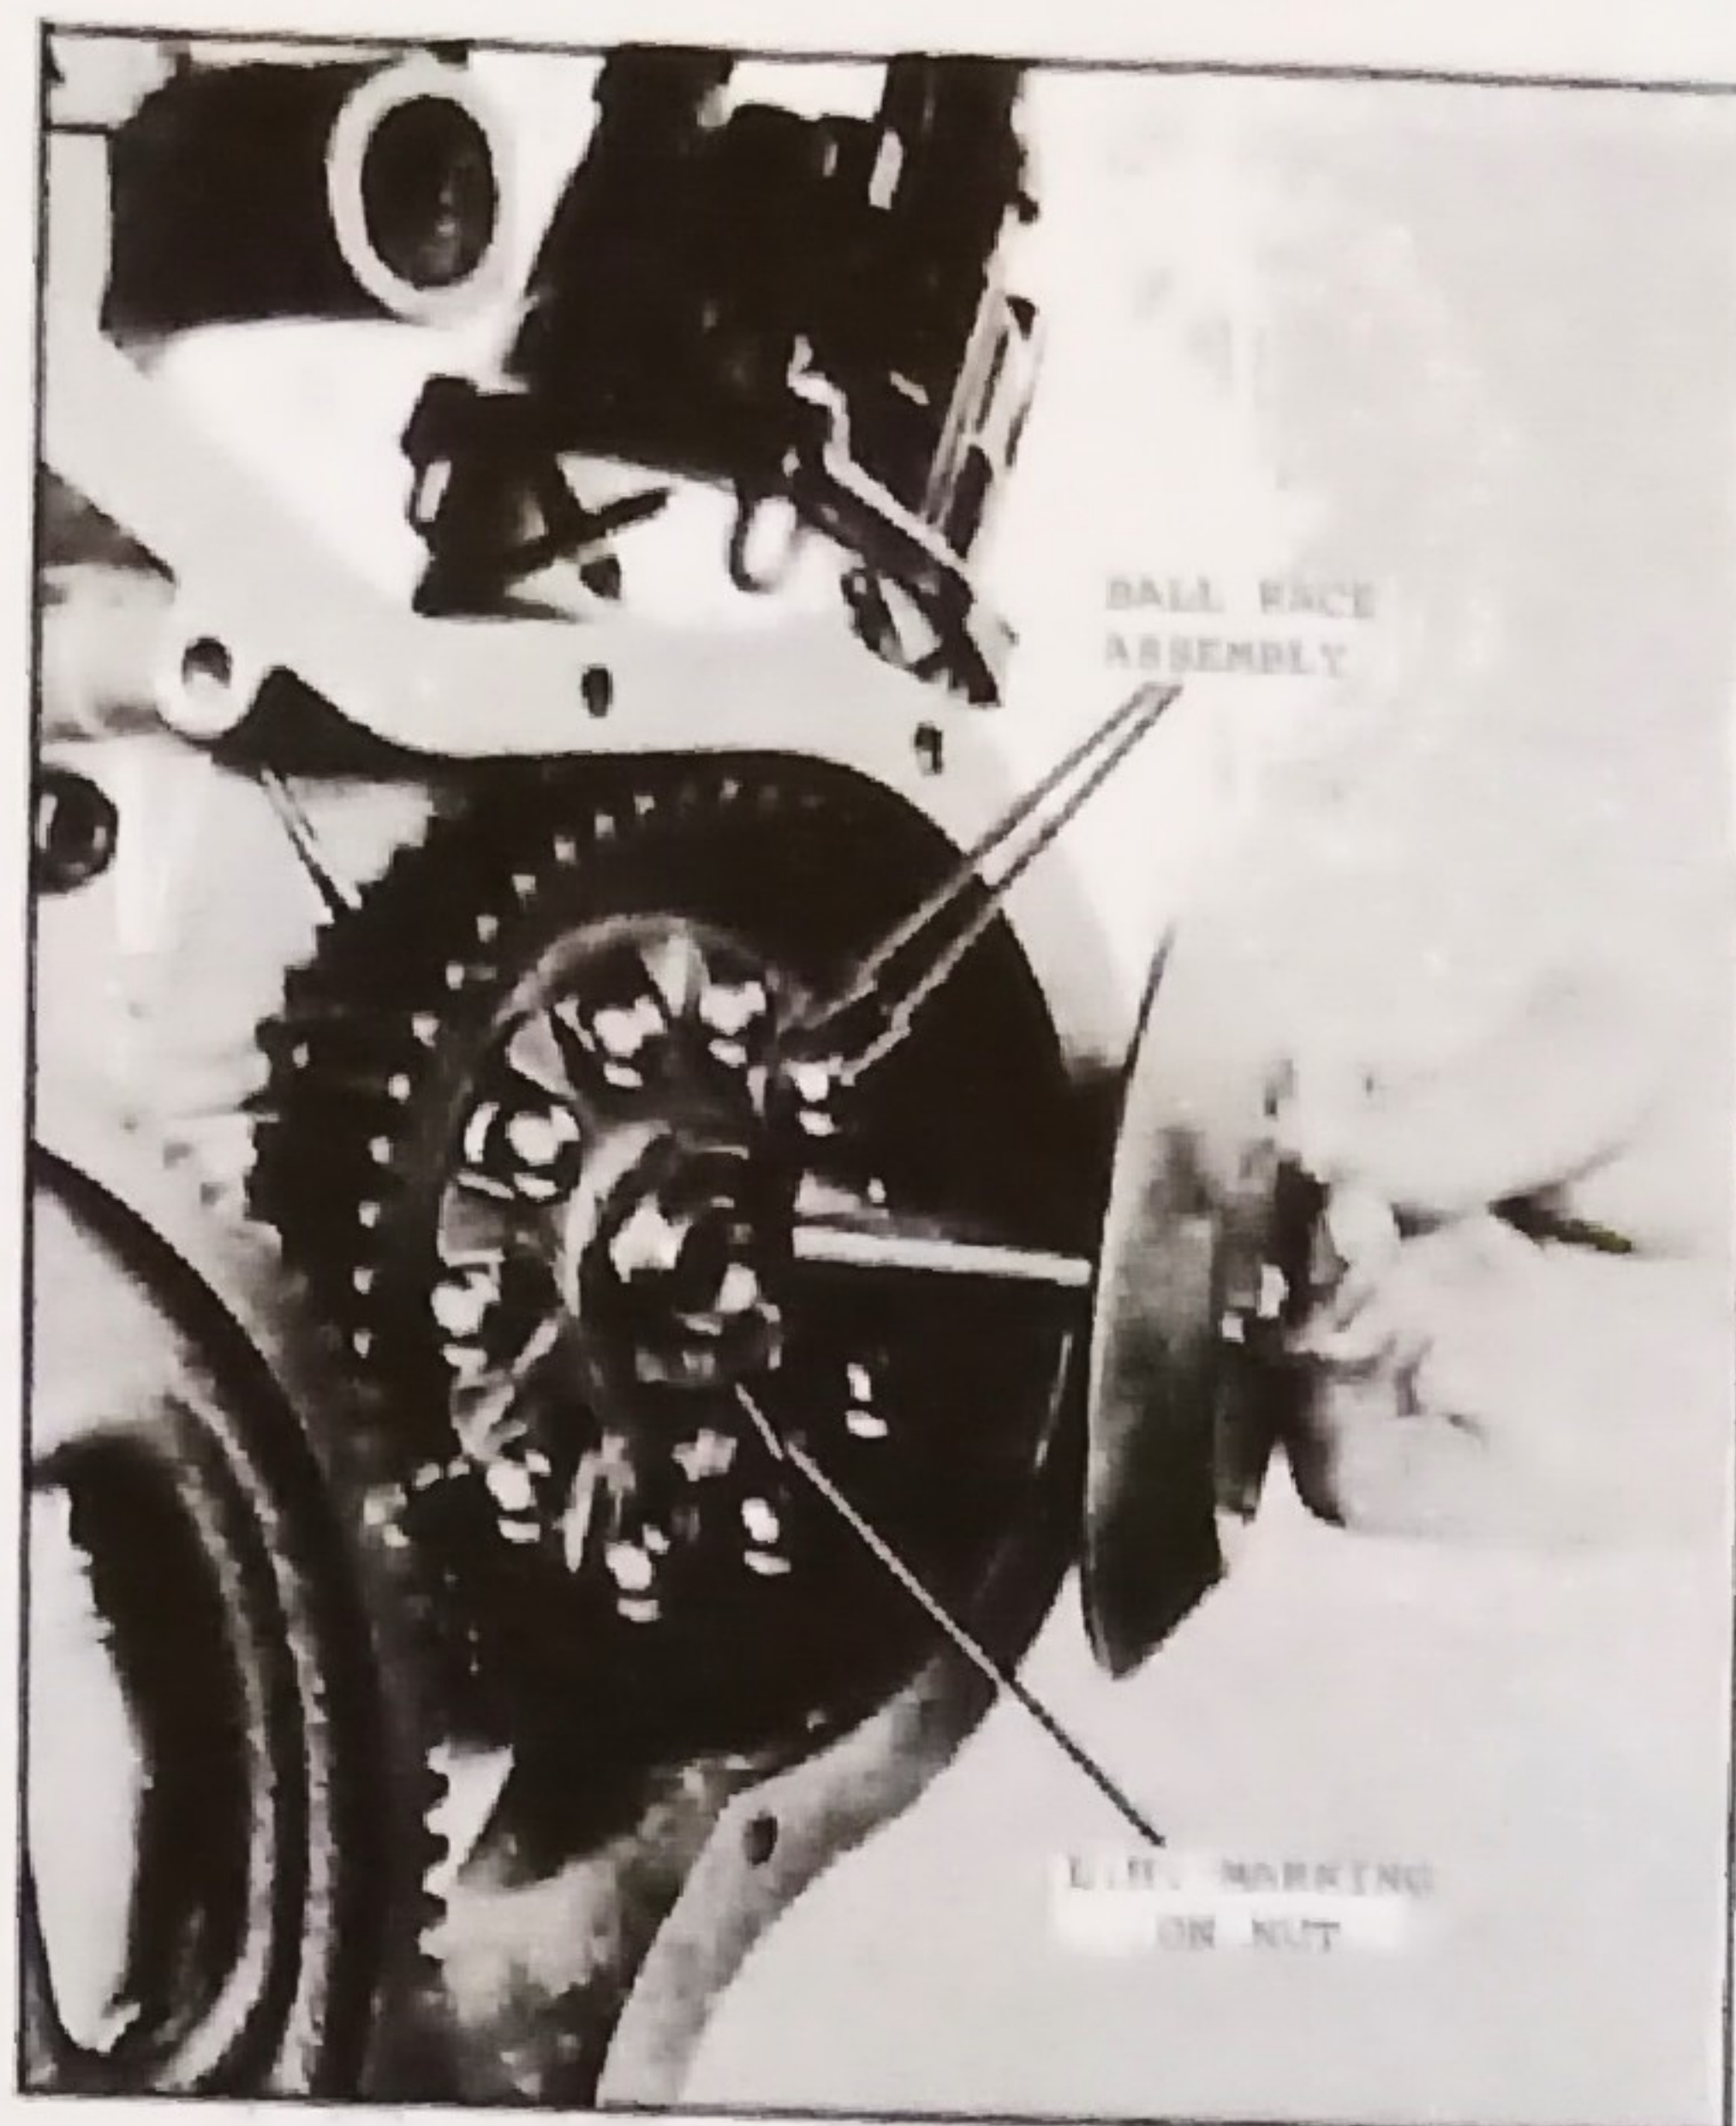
Removing or Installing the Governor Thrust Plate Assembly
